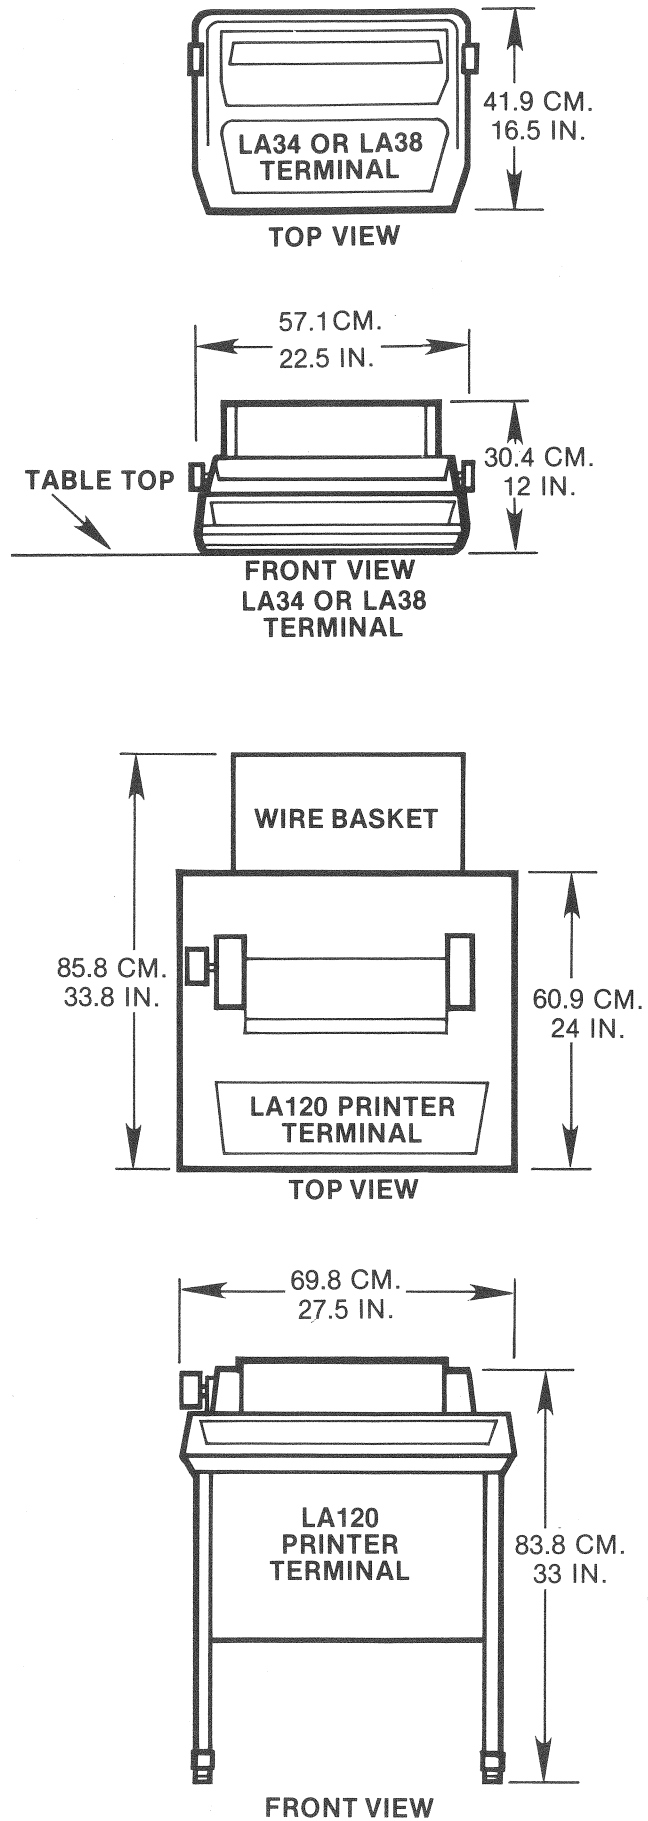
LA34, LA38, and LA120 Printer Terminal Dimensions
